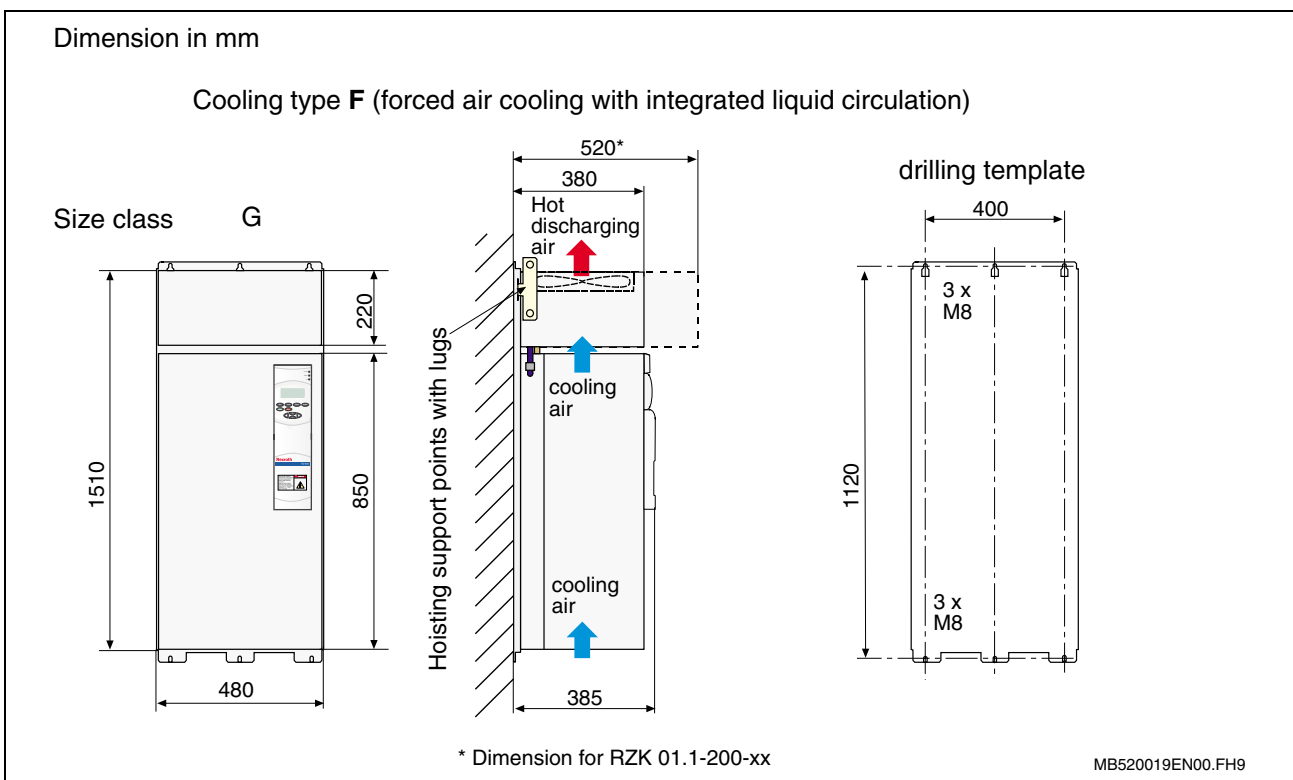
Dimension sheet of inverter, size class G with cooling type F
